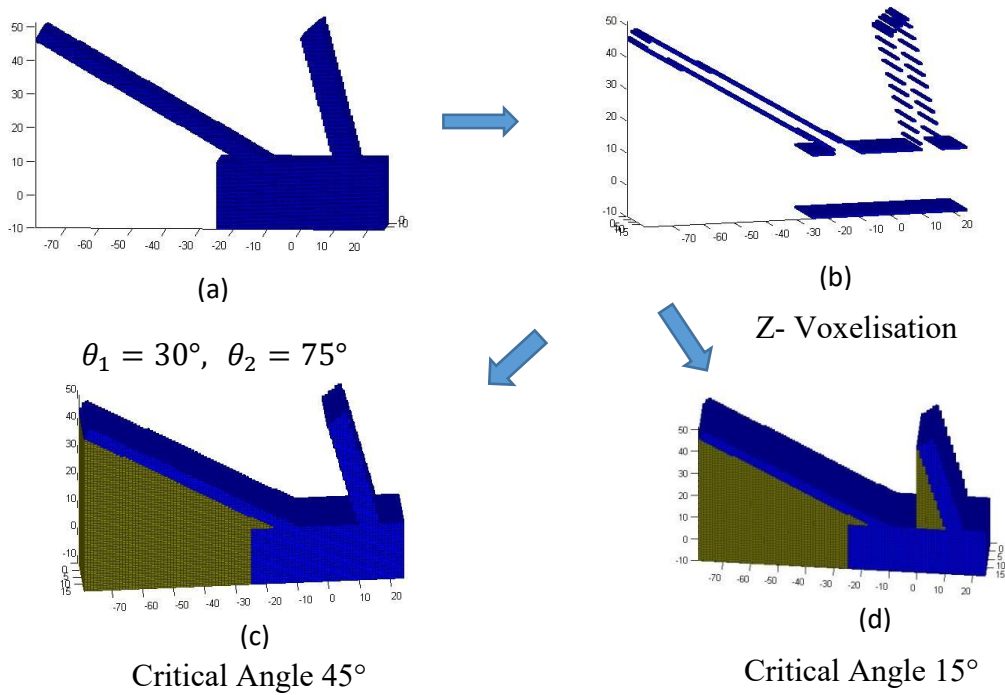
Support structure generation process for a sample part to be manufactured using Extrusion
